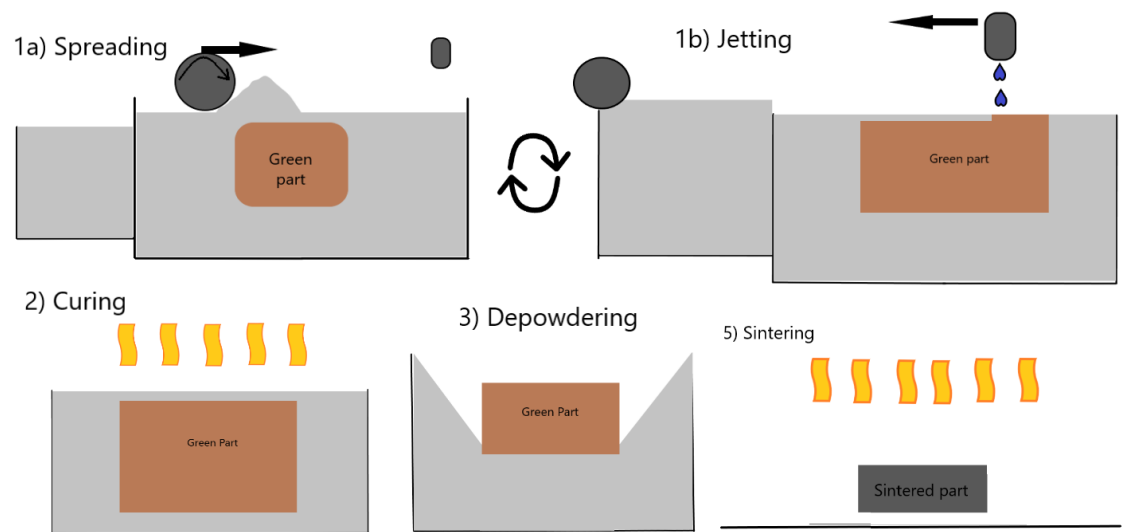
This schematic illustrates the MBJ process including the printing of the parts on the powder bed; different parts of the printer and their purpose; and the curing, debinding, and sintering of the part.
